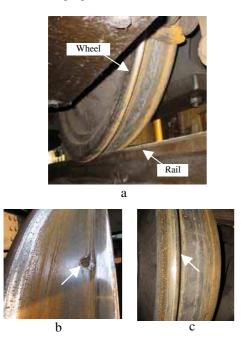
Surface damage due to surface initiated fatigue: a – railway-wheel contact; b – surface damage of wheel tread resulting from surface-induced cracks; c – damage in rim
